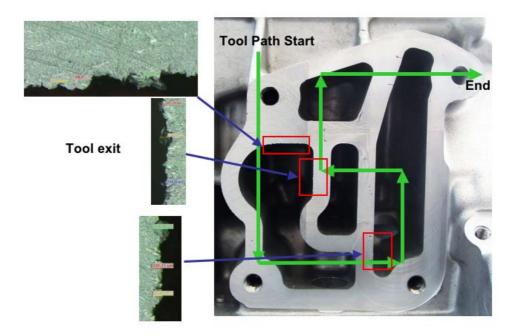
Conventional tool path for face milling engine block face and resulting burrs at key locations
